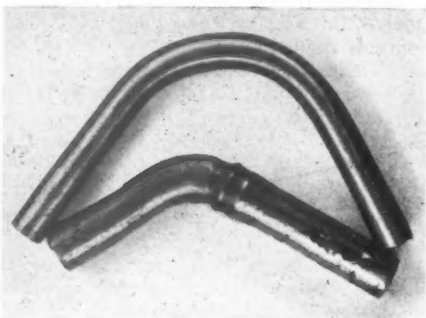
Pressure welds in  $\frac{3}{4}$ " diam. Al-Mn alloy bar after bending.
